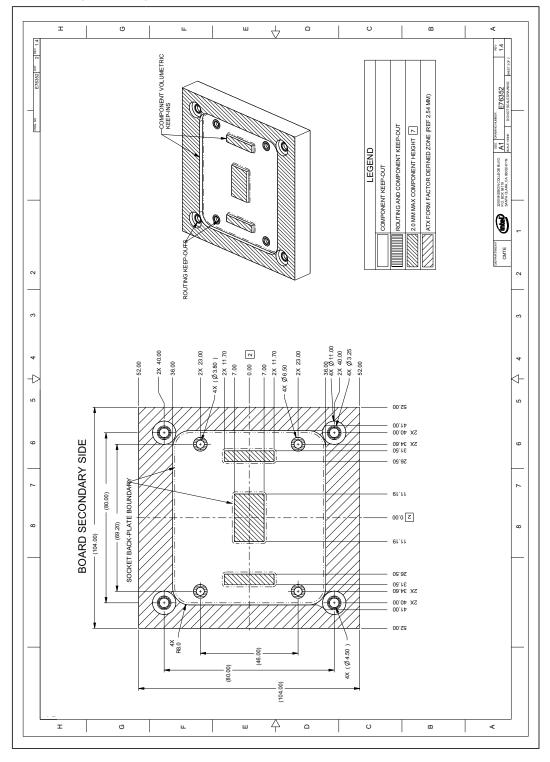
Board Keepin / Keepout Zones (Sheet 2 of 2)
